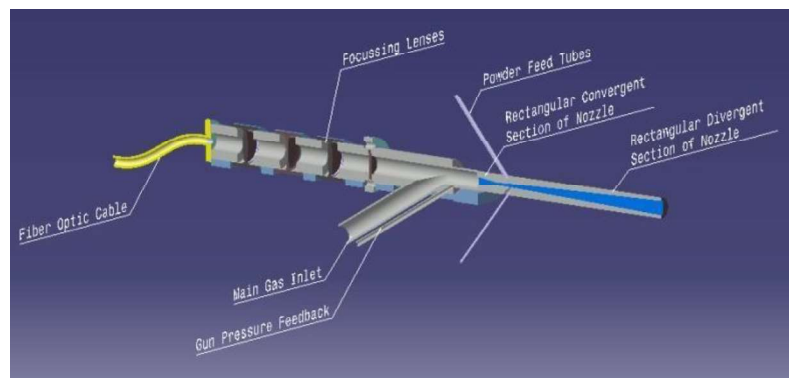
The U of M co-axial laser assisted cold spray nozzle
